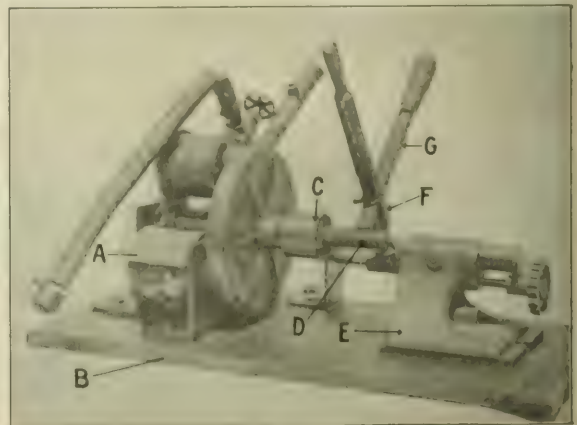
Pneumatic Lathe for Chasing Follower Bolts.
